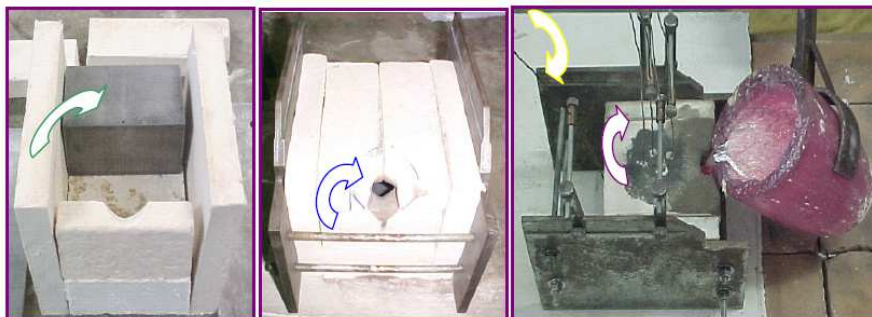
Casting chamber: (a) Partially mounted, (b) mounted and (c) the record of the moment of pouring.
